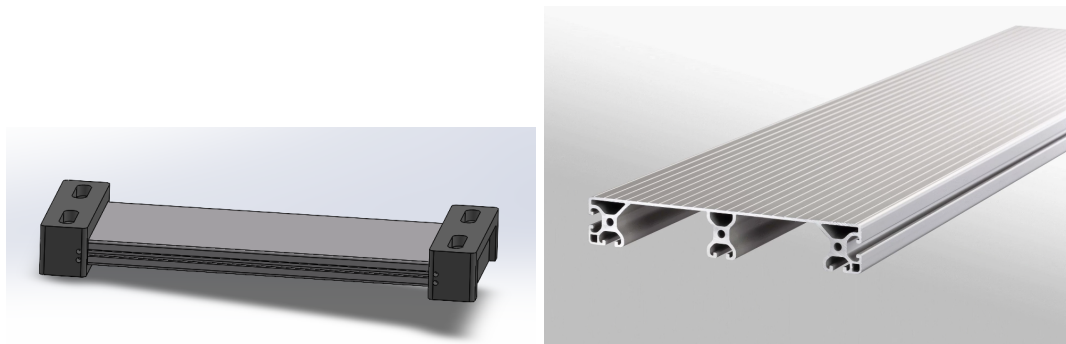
Step Profile 8 from item24, with Length = 616 mm shown connected to the POM castings.
